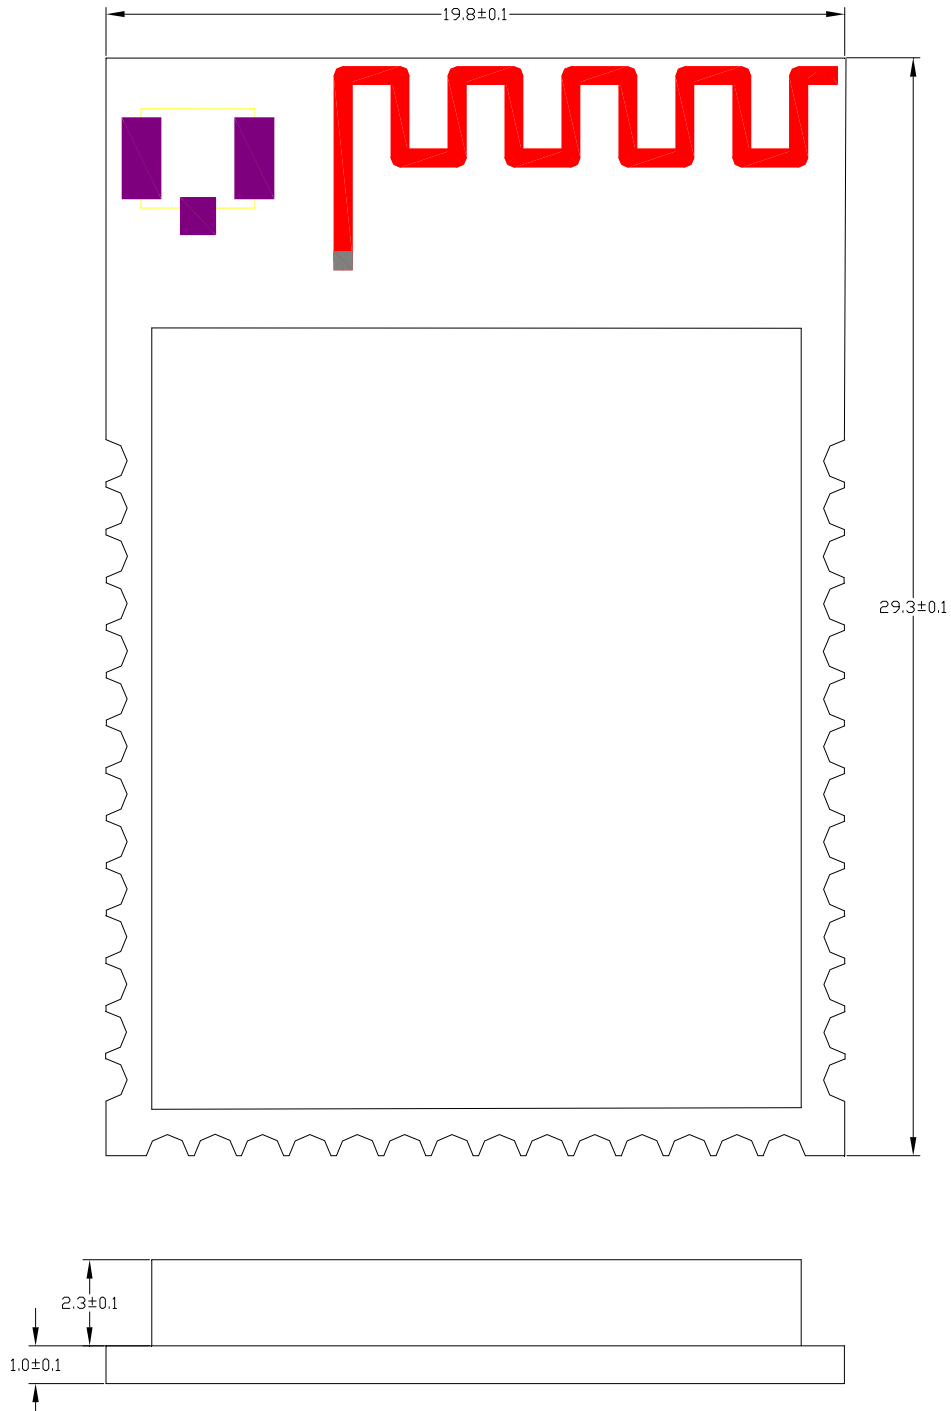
DFZM-TT2xx Module Dimensions (in mm)
